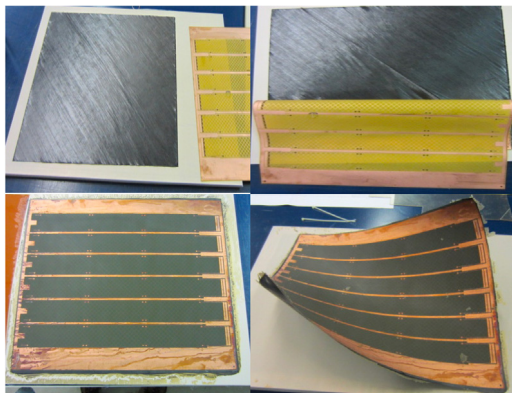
Bus cable lamination. Top left: preparing the carbon fiber sheet. Top right: placing the bus cable sheet over the carbon fiber sheet. Bottom left: gluing the sheets with epoxy. Bottom right: bus cable skin after co-curing in the oven.
